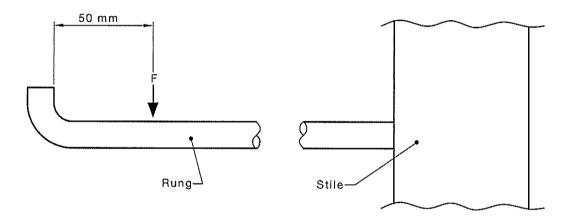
TYPICAL FORCE APPLICATION POINT FOR SINGLE-STILE LADDER
